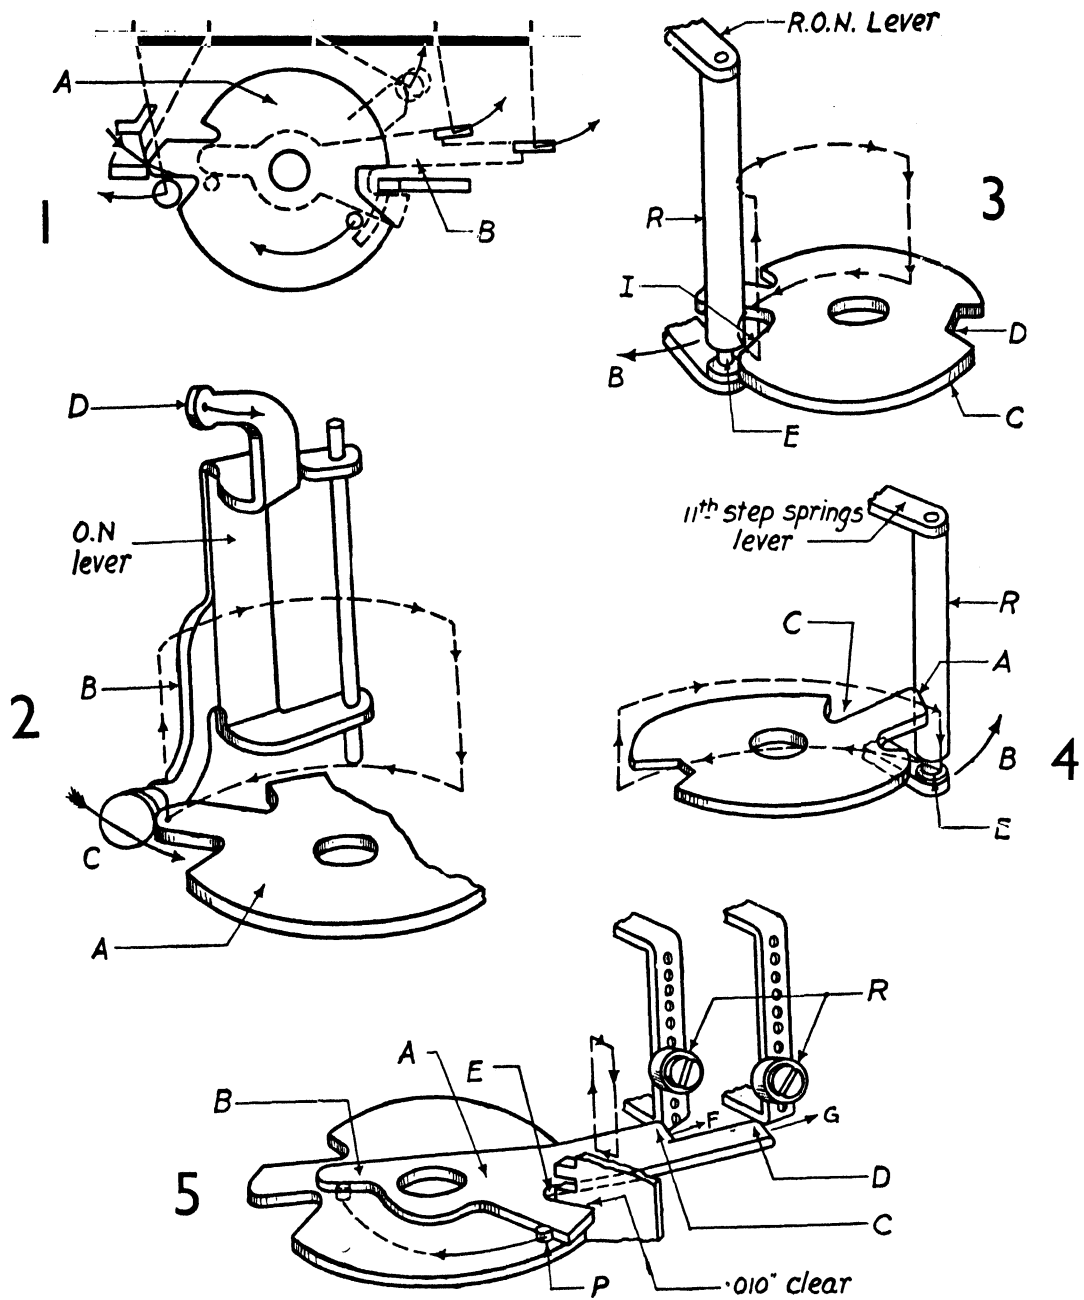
CONTROL OF MECHANICALLY OPERATED CONTACTS
